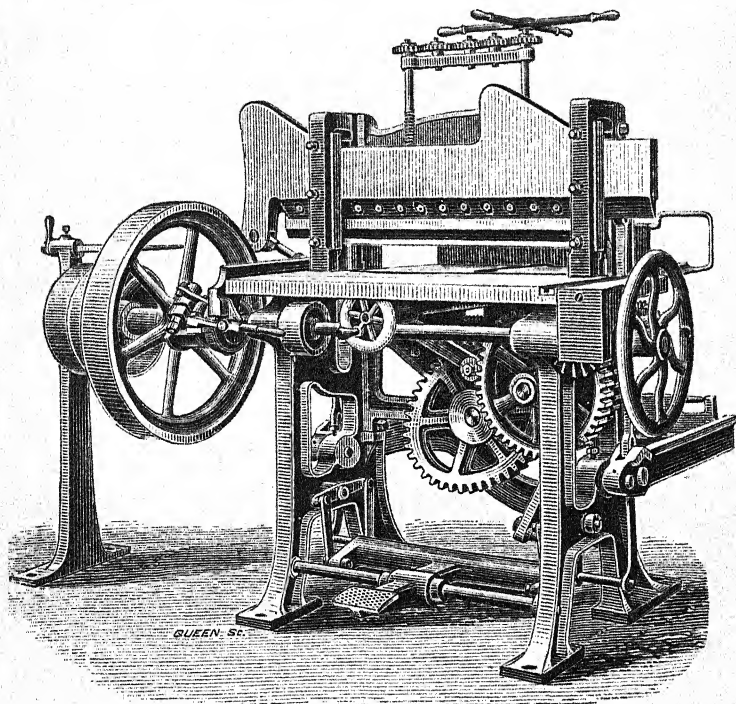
FOURNIVAL'S CUTTING MACHINE.
